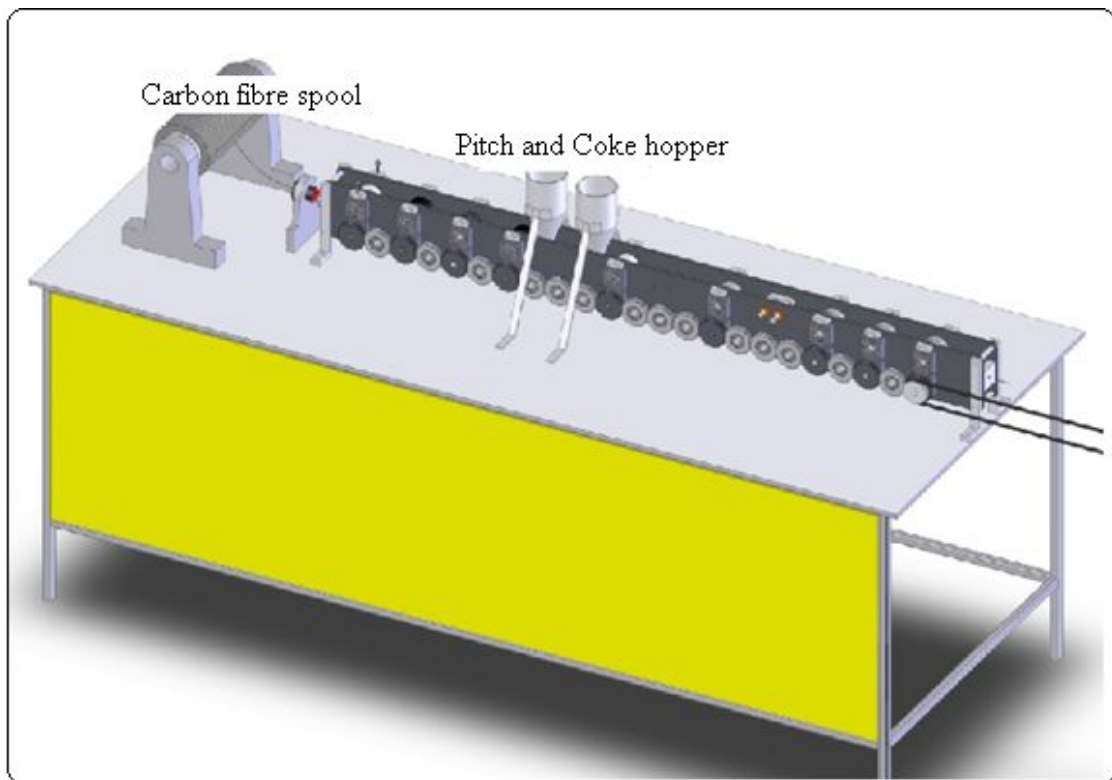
(b) Isometric view describing the first stage of operation of the machine
